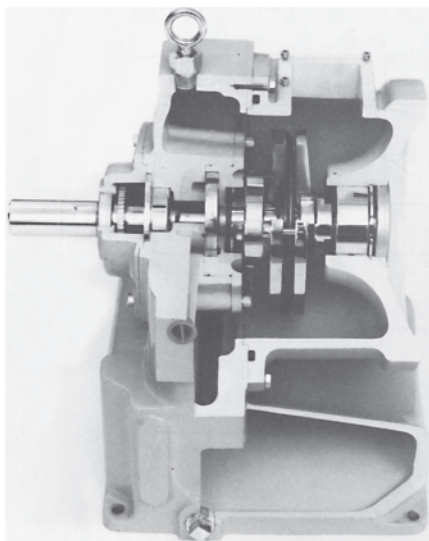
Cross section of a hydroviscous clutch assembly. (Courtesy Great Lakes Hydraulics, Inc., Grand Rapids, MI.)
